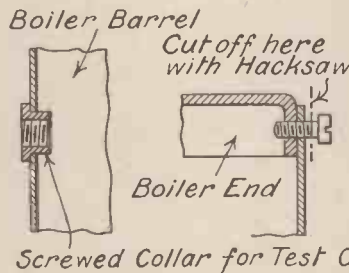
Details of screwed collar fitting for test cock, and method of screw-pinning the boiler end.
